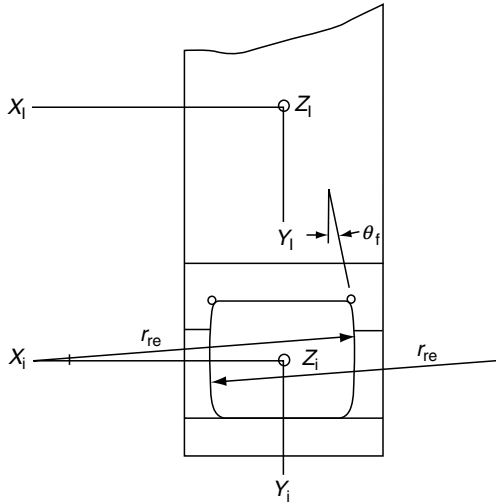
Cross-section through a cylindrical roller bearing that has a flanged inner ring.
